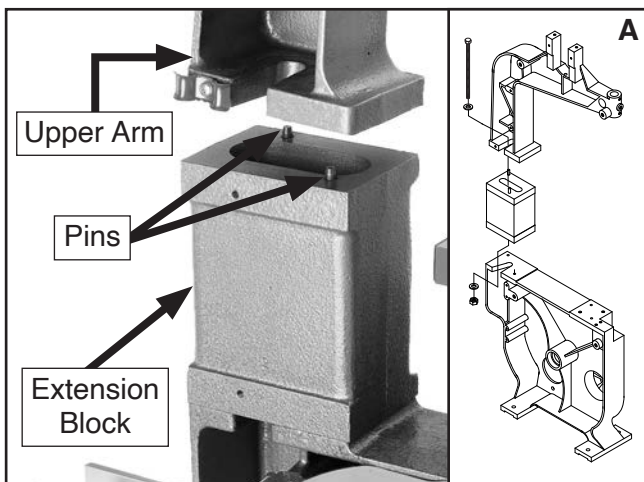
Placing upper arm on extension block and attaching extension block bolt assembly.
